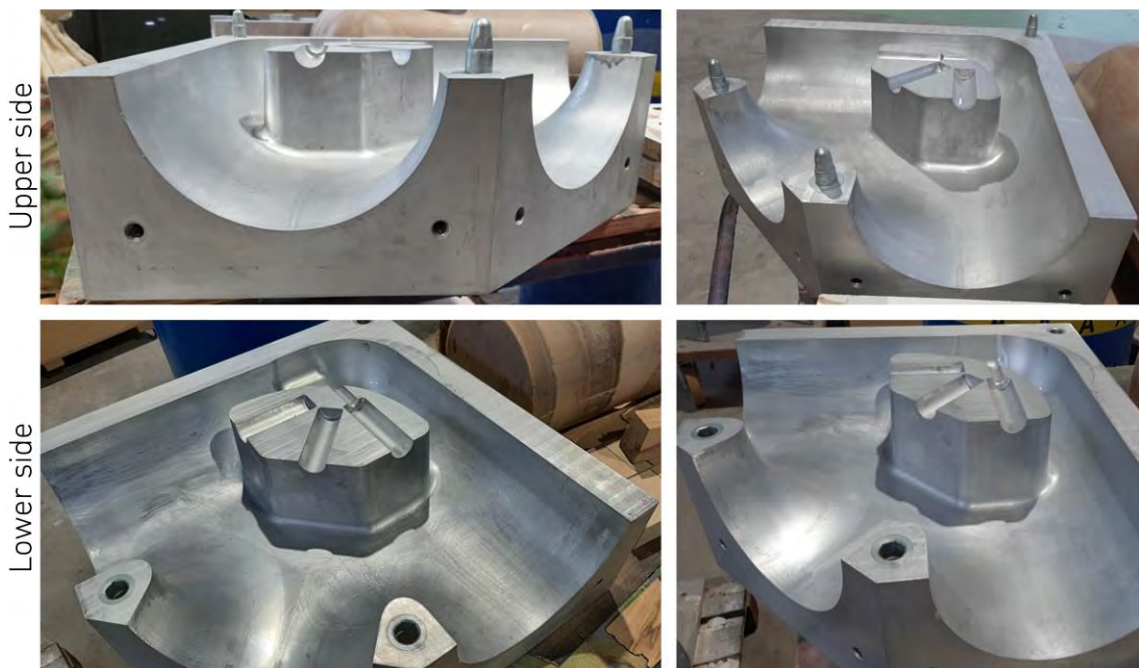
Two-parted aluminium casting mould (Prototype)
